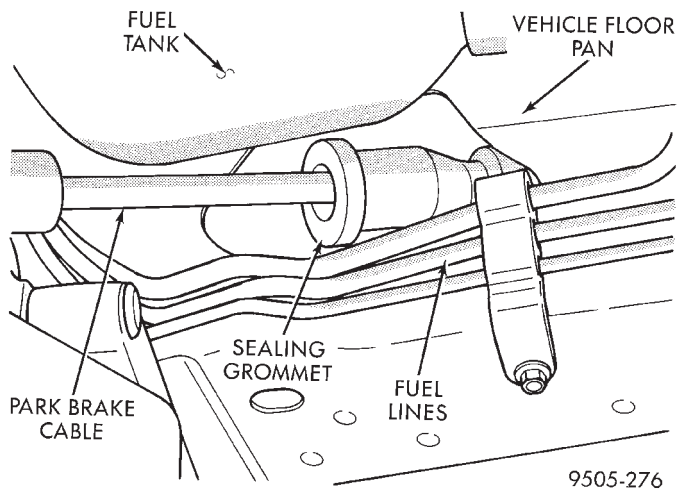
Park Brake Cable Removal / Installation At Floor Pan
